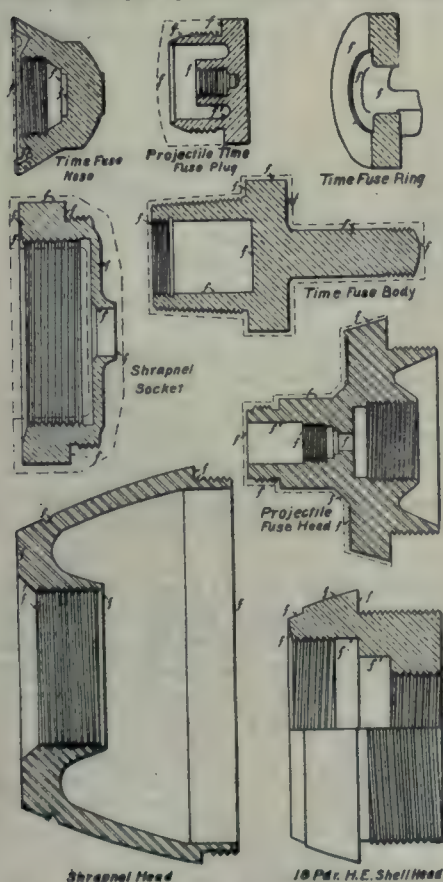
DETAIL OF SHELL PARTS FOR MACHINING.
